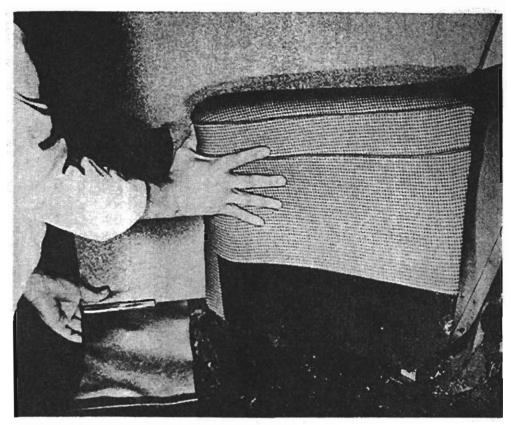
Bend the Lower End of the Panel Inward While Pushing the Panel to the Rear and Upward.
